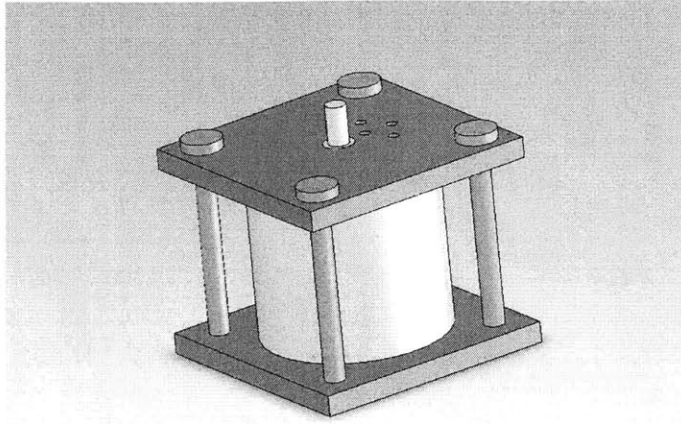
Solid model of the initial prototype for the hydraulic vane motor
